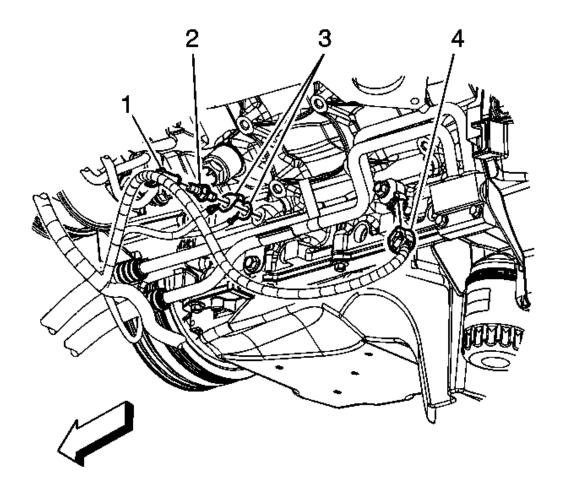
View Of Engine Harness Components Courtesy of GENERAL MOTORS CORP.
